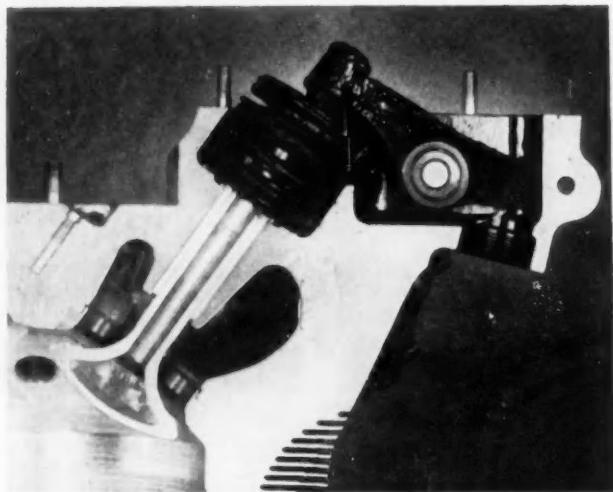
Section of exhaust ear showing heavy coking of valve spring and rocker box
